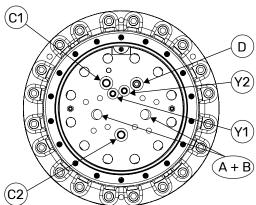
The hydraulic connections of a 4-speed C255 motor with parking brake.
